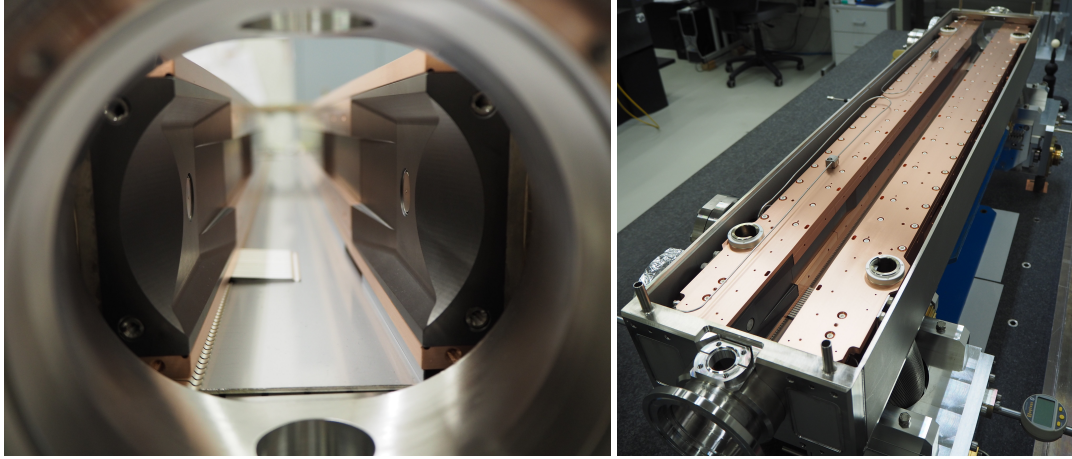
Photographs of a low-impedance primary collimator, TCPPM, with the vacuum tank opened before final welding: front view (left) and top view (right). The BPMs embedded in the jaw’s tapered part are also visible. (Courtesy of F. Carra, CERN).
